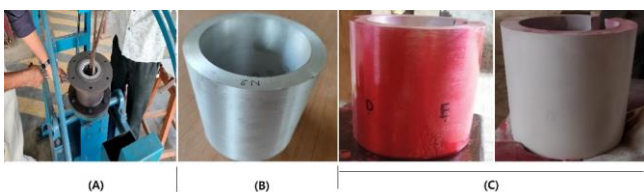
(A) Cylinder extracting from mold (B) Secondary machining (C) DPT
